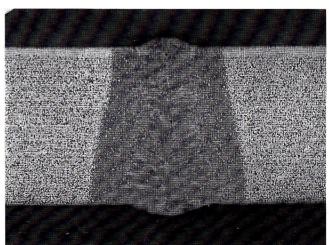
Macrophotograph of laser weldment at 2500 W and a pass speed of 1.5 m/ min.
